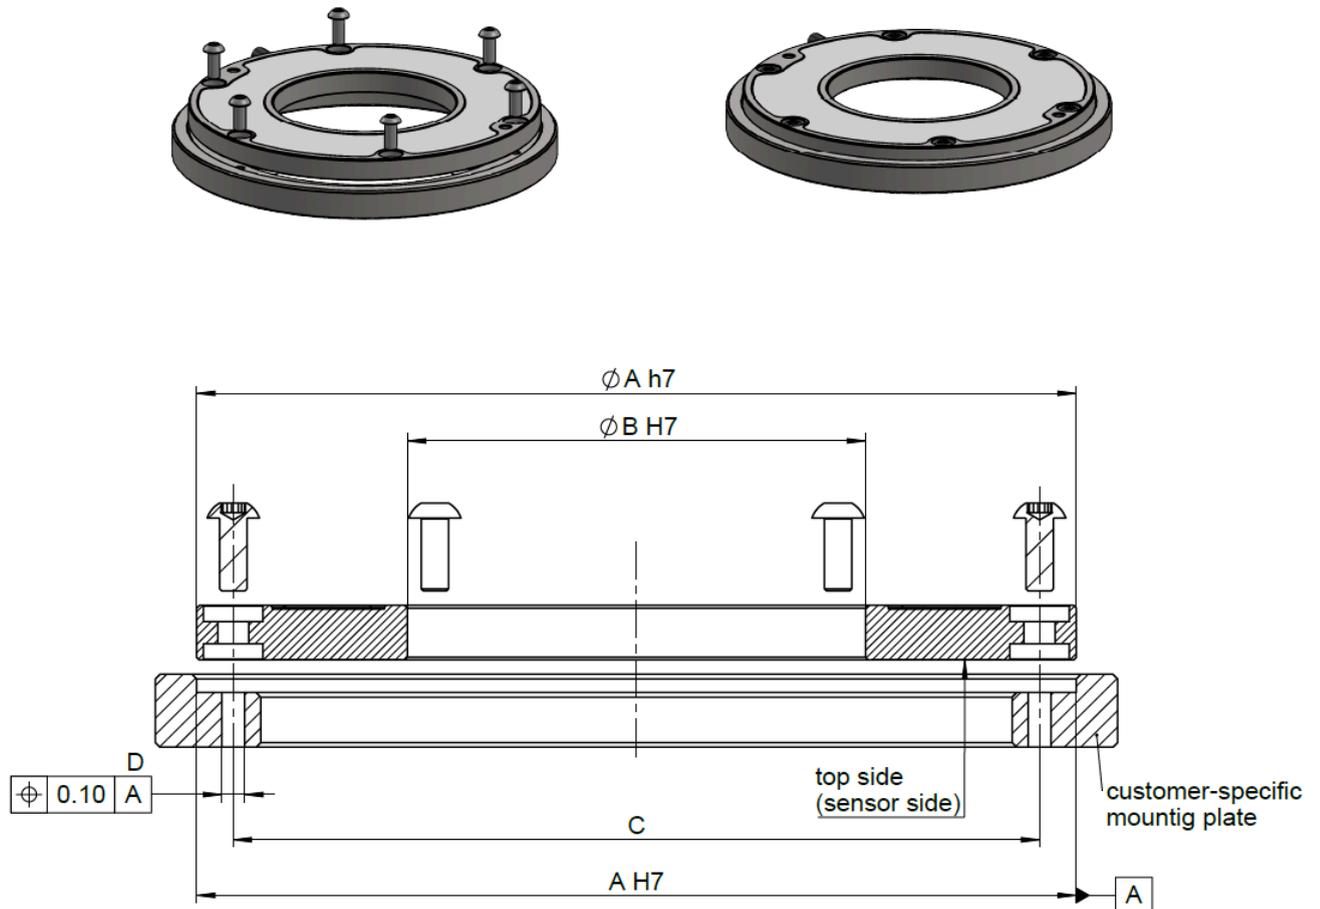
Stator (GAS) mounting using OD sliding fit
